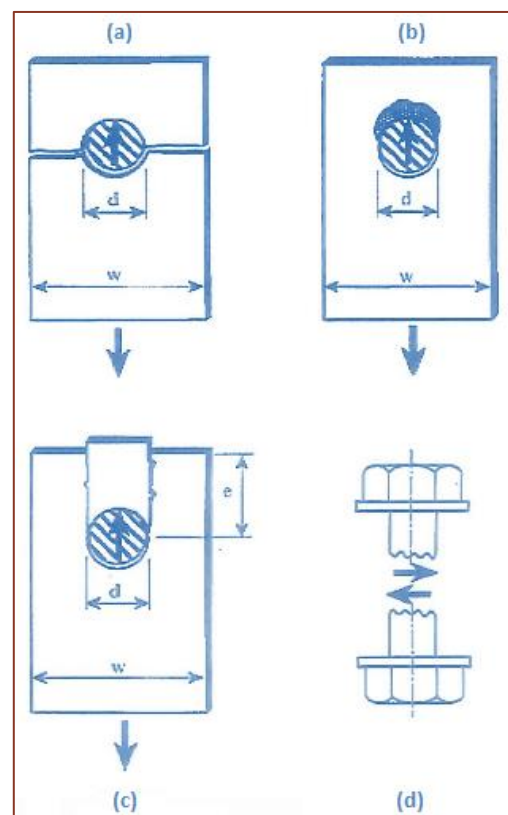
Failure modes of a bolted joint [Bron XX]
